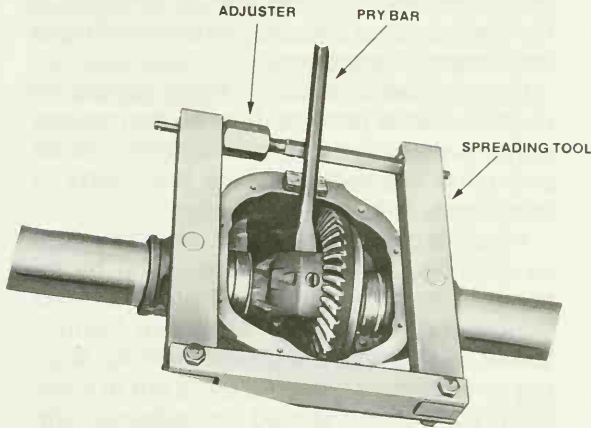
The spreading tool spreads the housing apart to allow removal of the case. (Chrysler Corporation)
